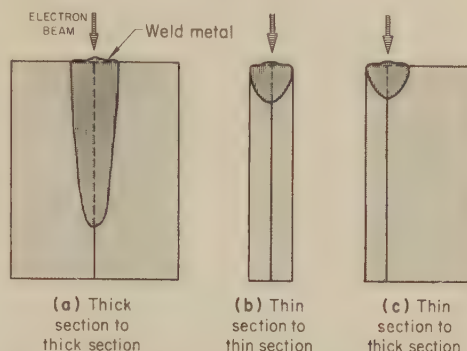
Three types of electron beam welds in edge joints between members of similar or different section thicknesses
